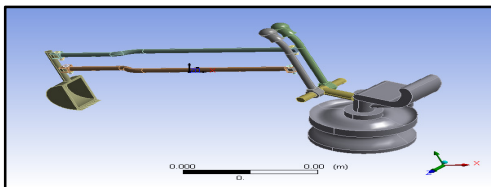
Overall Assembled Design of Earth Digger Machine.
